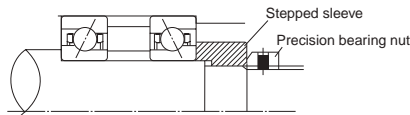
Tightening with stepped sleeve + precision bearing nut
